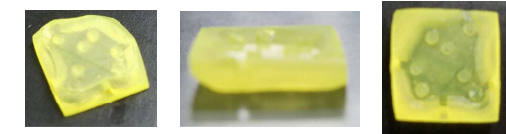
Test Piece Final Pictures (from left to right: bottom, side, top view)
